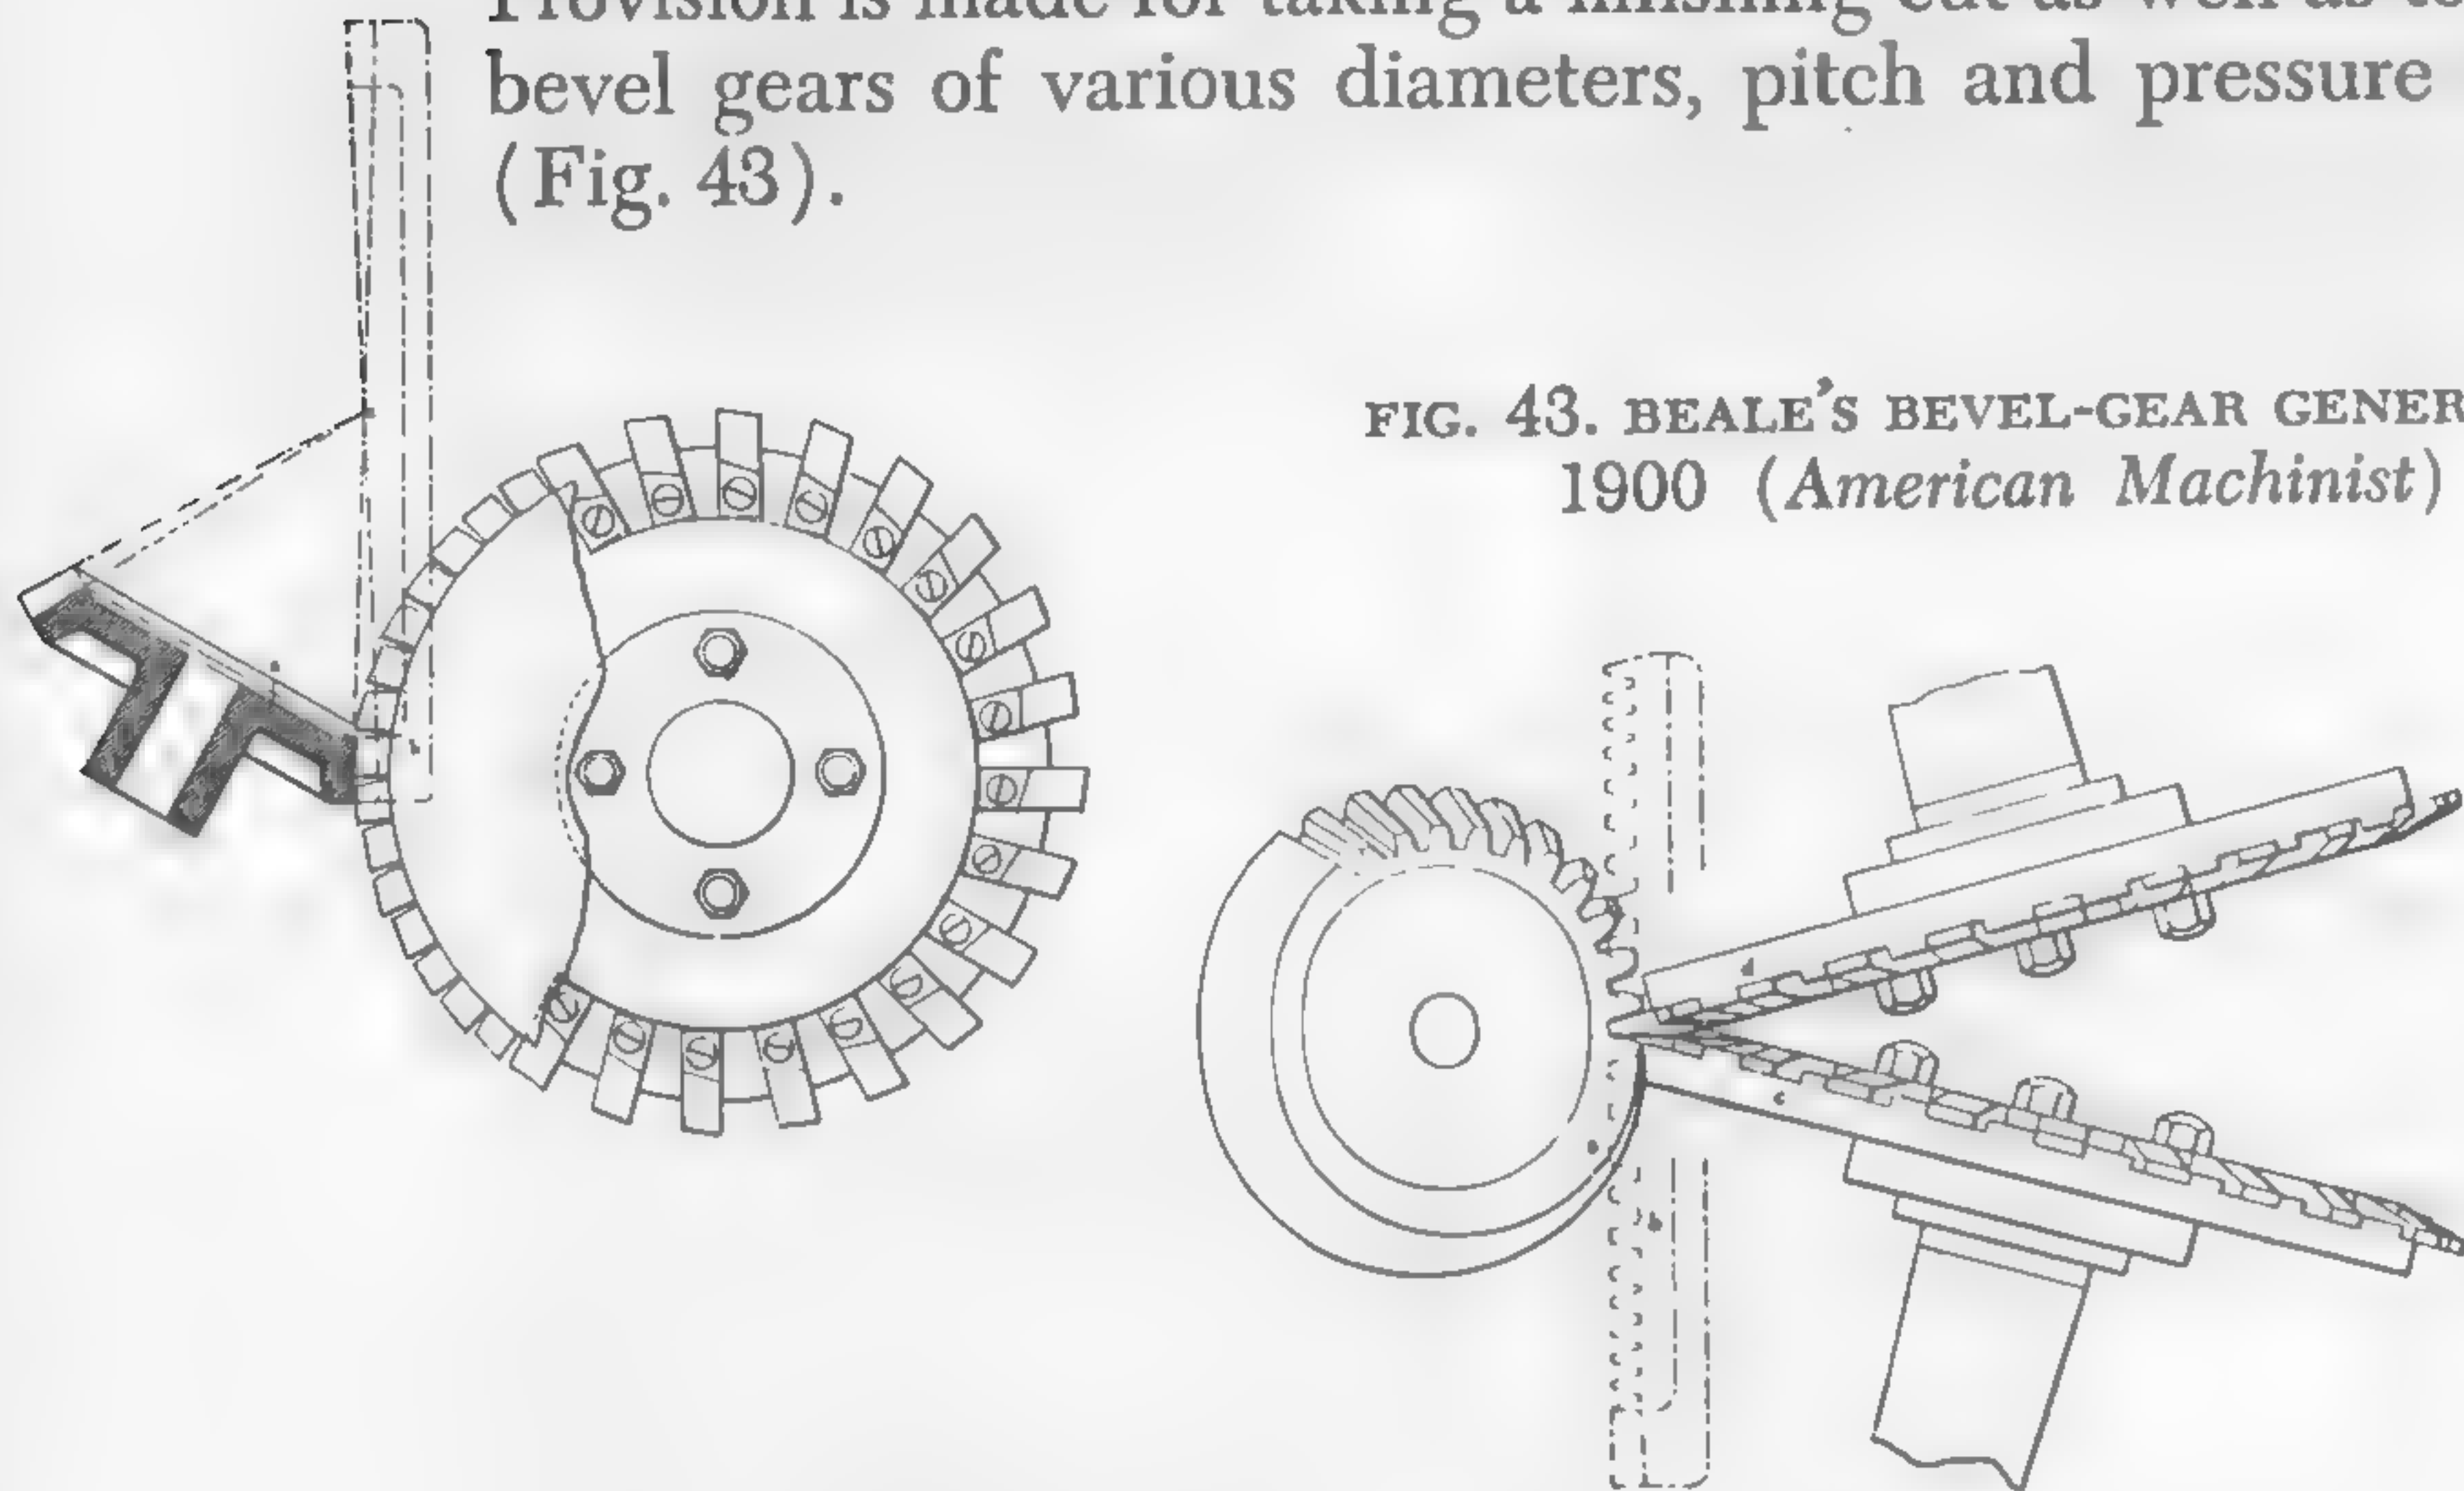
BEALE'S BEVEL-GEAR GENERATOR, 1900 (*American Machinist*)
